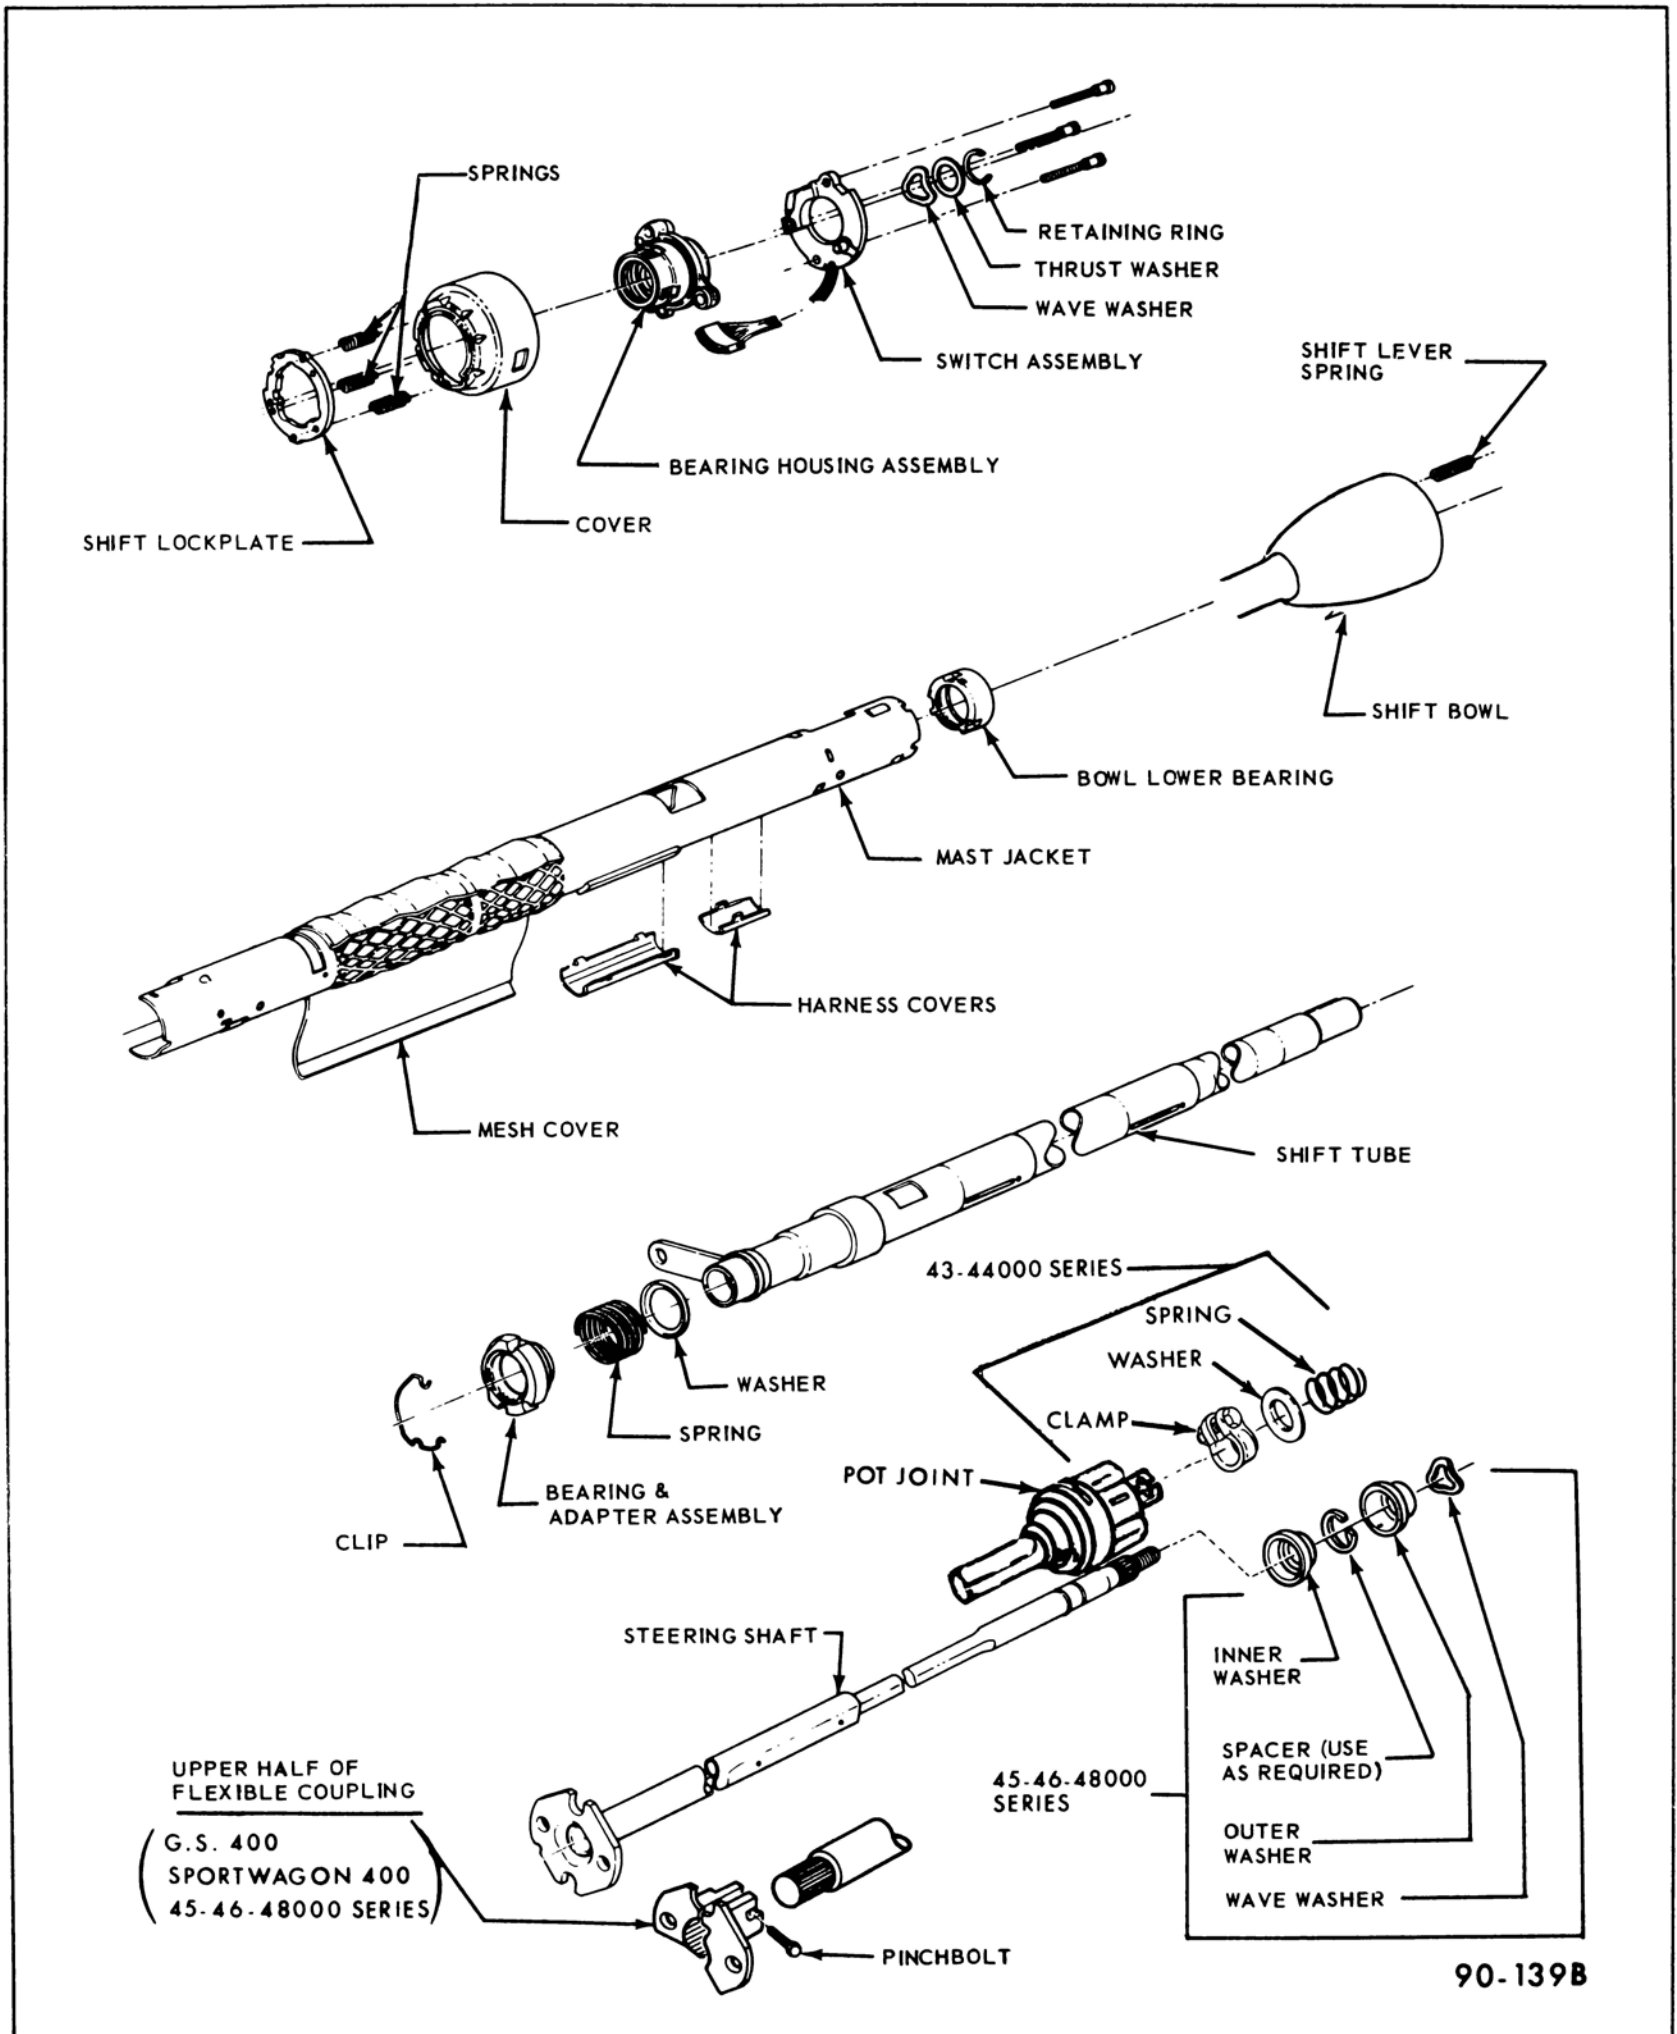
Standard (Non-tilt) Steering Column Assembly
